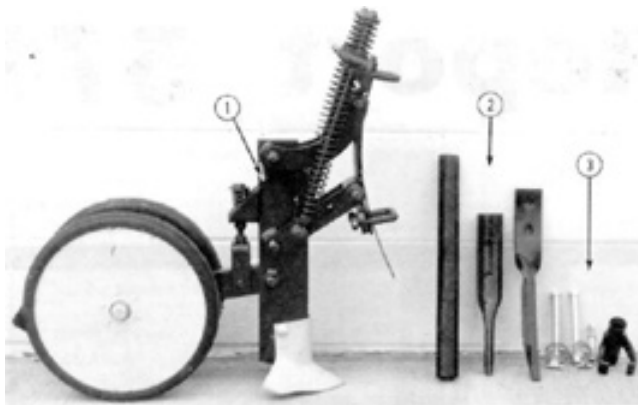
Morris Air Hoe Packer Attachment: (1) Hoe Opener and Packer Assembly, (2) Knife Opener and Boot, (3) Attaching Hardware.
